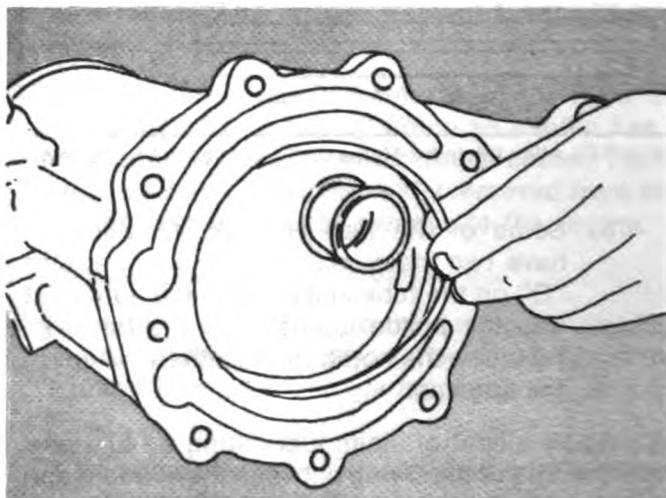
Remove The O-Ring From The Thermostat End Of The Housing.
